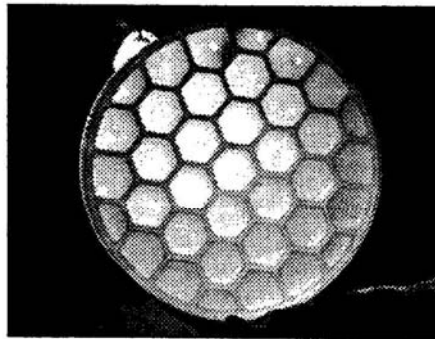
Lightweight ULE Mirror Blank with CNC Machined Core
